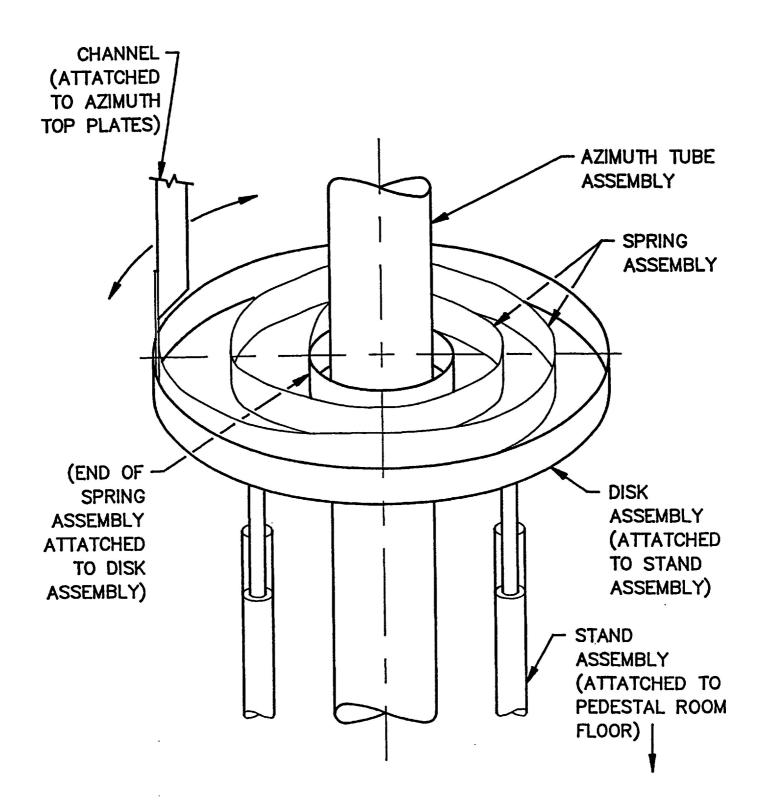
NEW AZIMUTH CABLE WRAP ARRANGEMENT.
